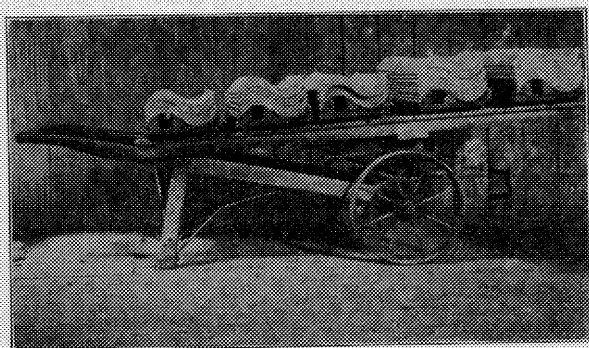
Buggy of Dry Tiles on Way to the Kiln.
